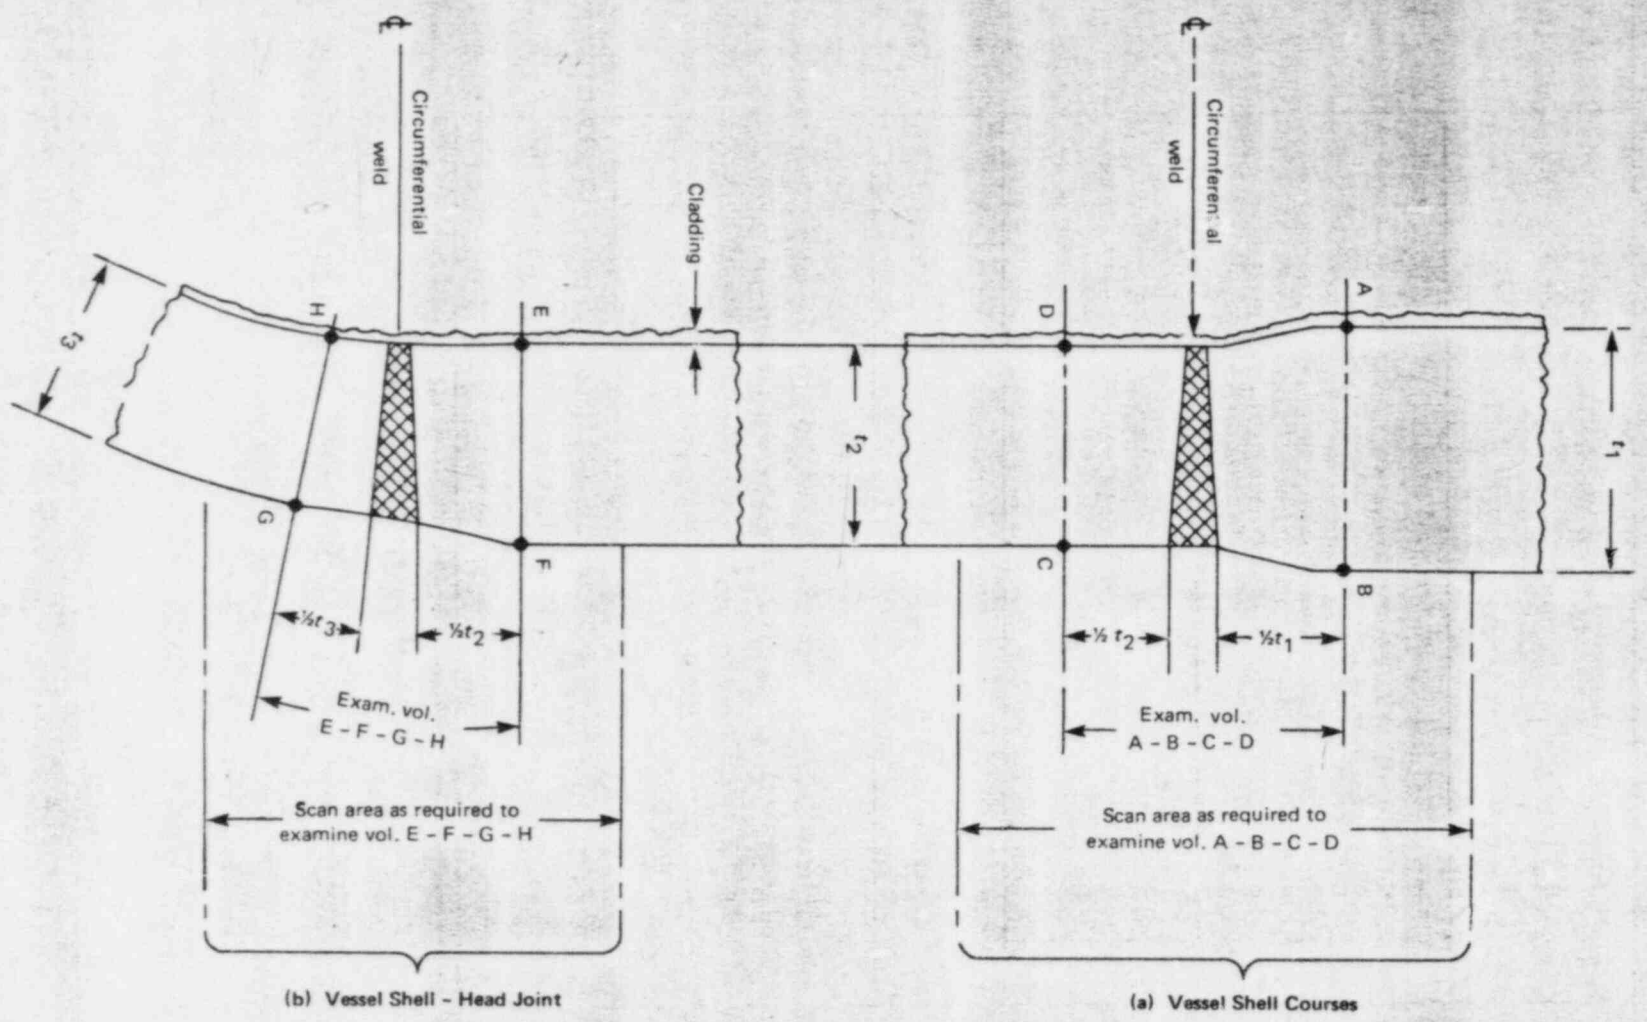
VESSEL SHELL CIRCUMFERENTIAL WELD JOINTS
